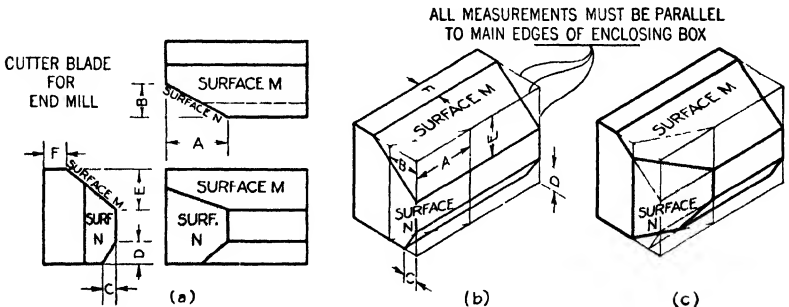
INCLINED SURFACES IN ISOMETRIC
